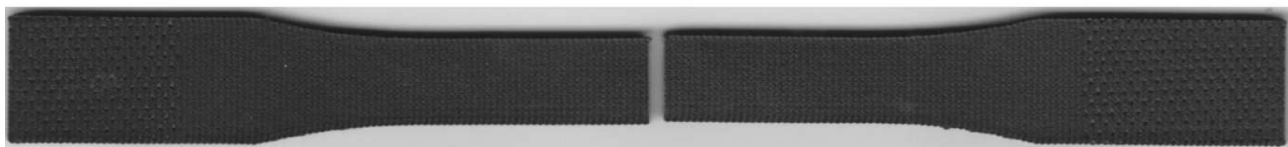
Failure of the specimen without walls; The crack is located in the gauge length area
